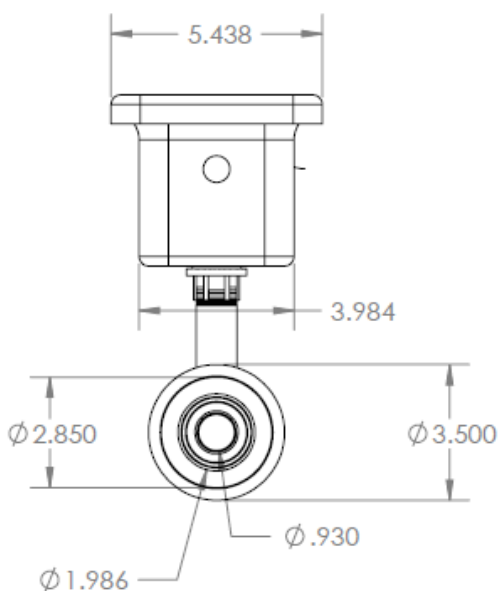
DENSITRAK 1AA0/SVT - FRONT VIEW - DIMENSIONS
